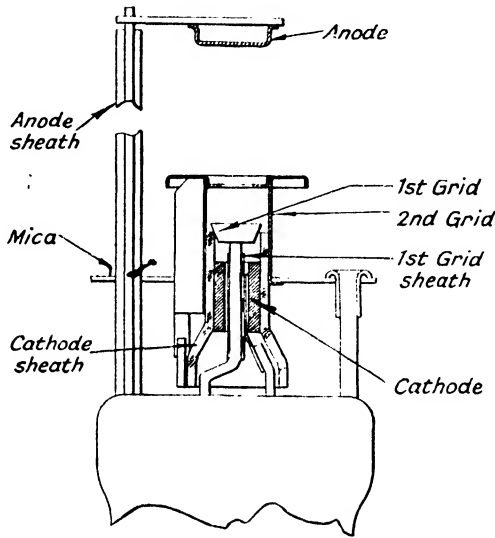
Electrode assembly details of Ferranti N.S.P.I.
